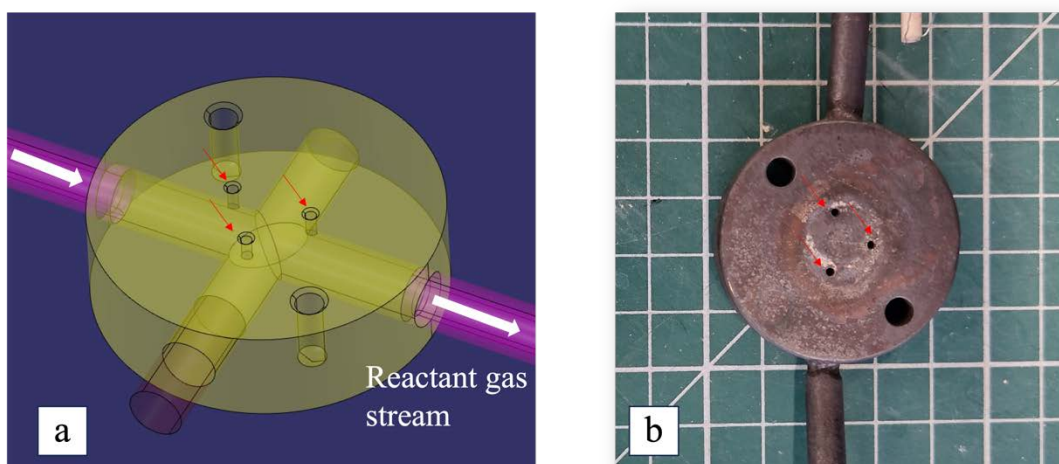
In-house designed gas manifolds for SOFC button cell. CAD design (a) and in-house fabricated manifold (b).
